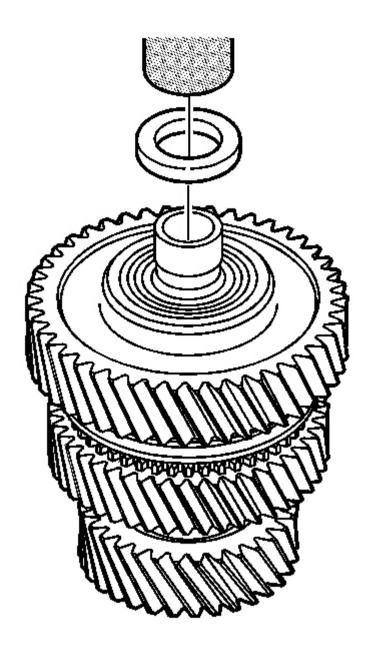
Installing Thrust Washer Courtesy of GENERAL MOTORS CORP.
